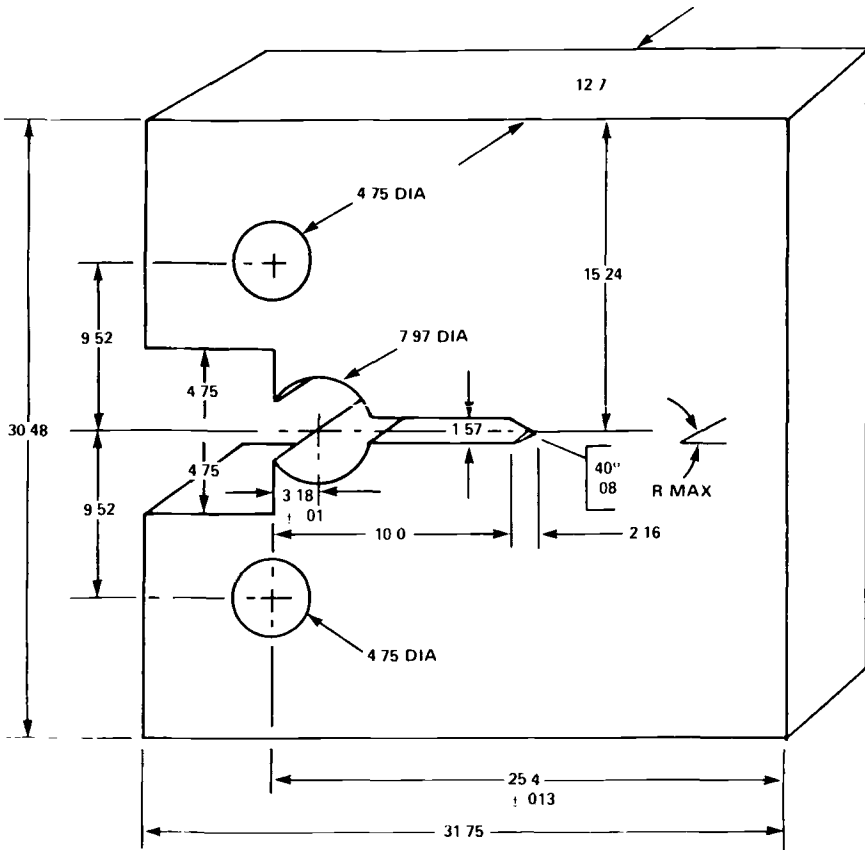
Specimen drawing of  $\frac{1}{2}$ -scale compact specimen. Dimensions are in mm.
